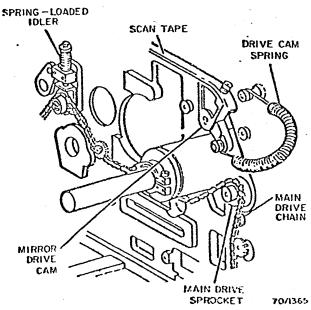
Main Drive Motor and Gear Box Assembly in Operating Position
